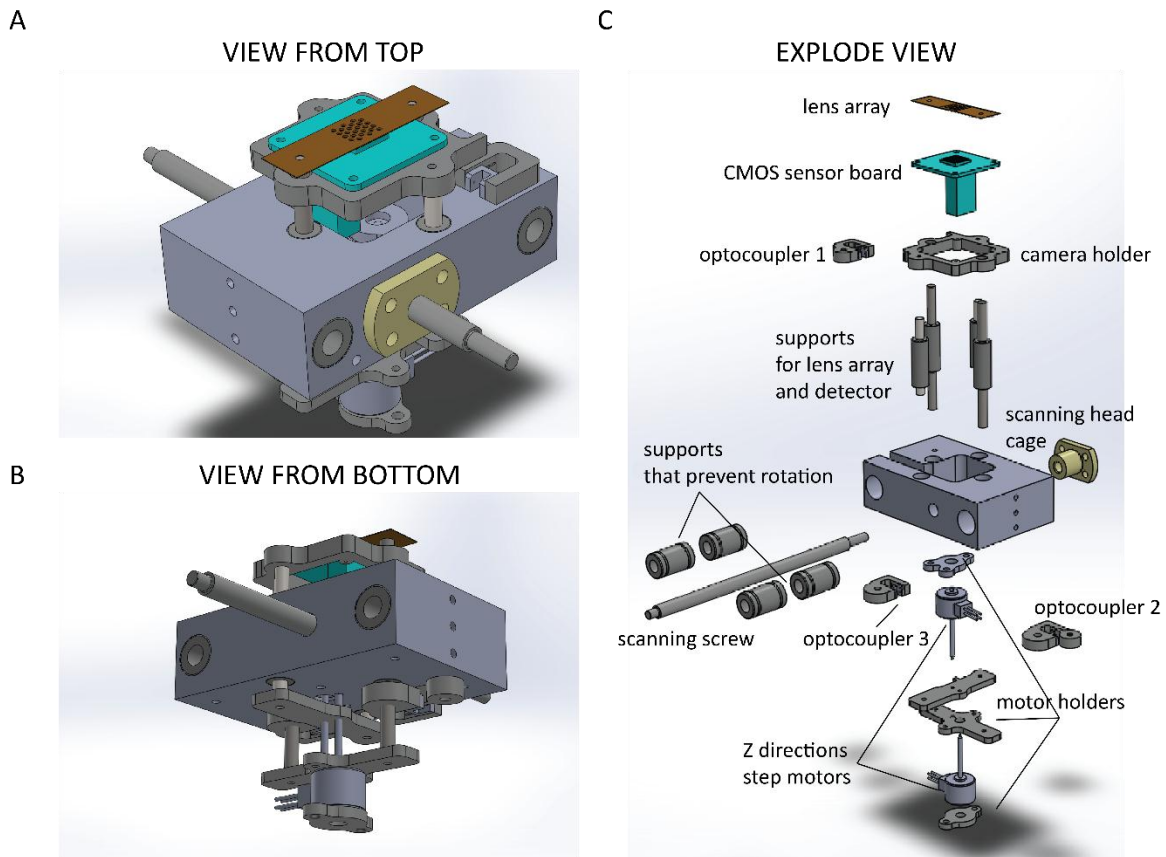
Design of the scanning head seen for top side (A) and bottom side view (B). The components it comprises of are illustrated in explode view (C).
